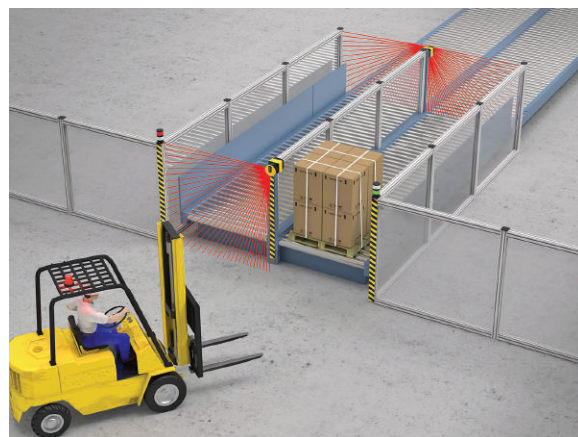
Safety laser scanner mounted on a transfer cart.
